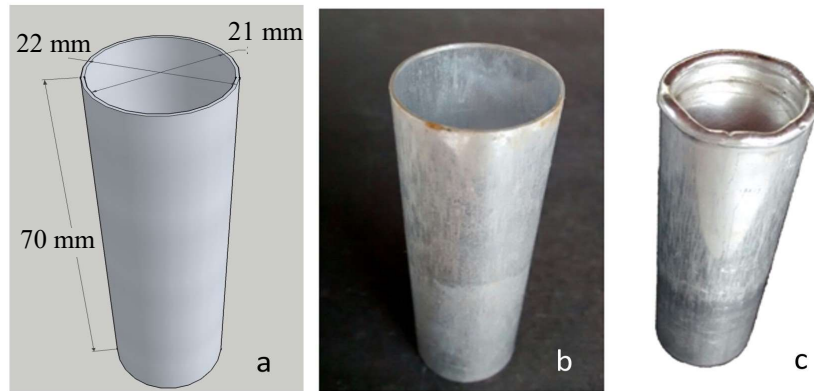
Aluminum capsule used in the IPEN IEA-R1 nuclear reactor. (a) dimensional, (b) real example, (c) with TIG welded lid.
